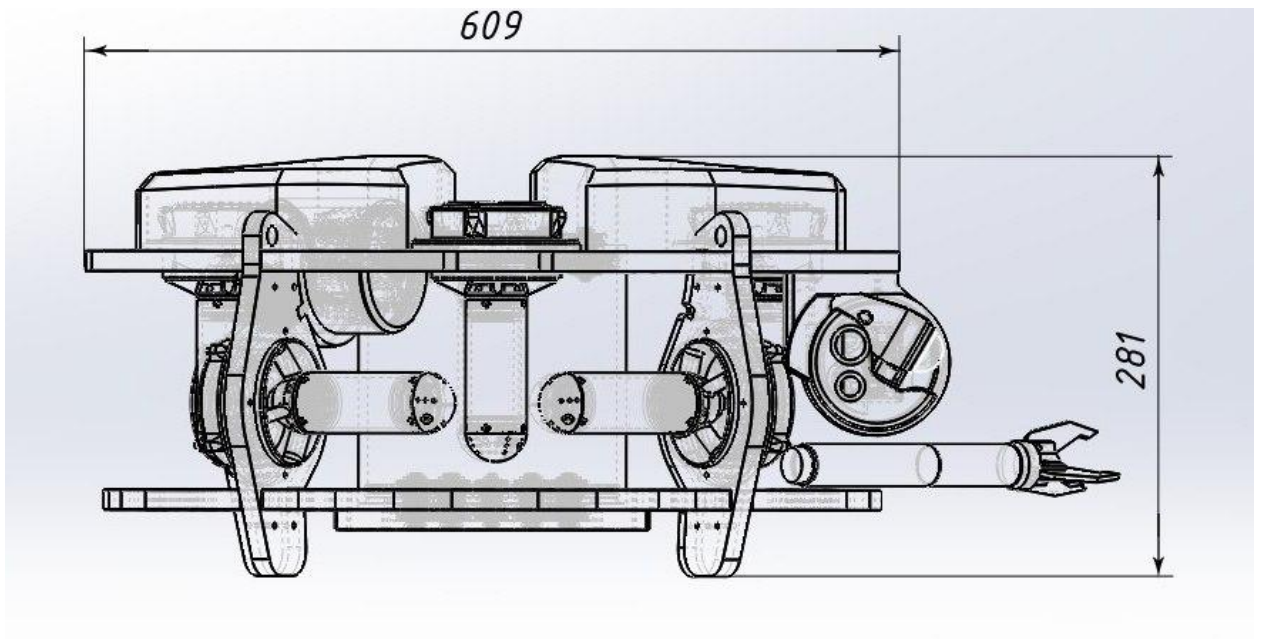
Dimensional drawing of AKVATOR IceBerg
